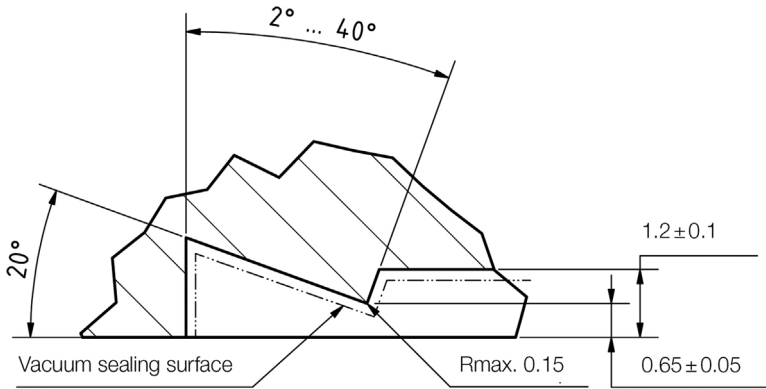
CF flange system: cross-section drawing of the knife edge.
